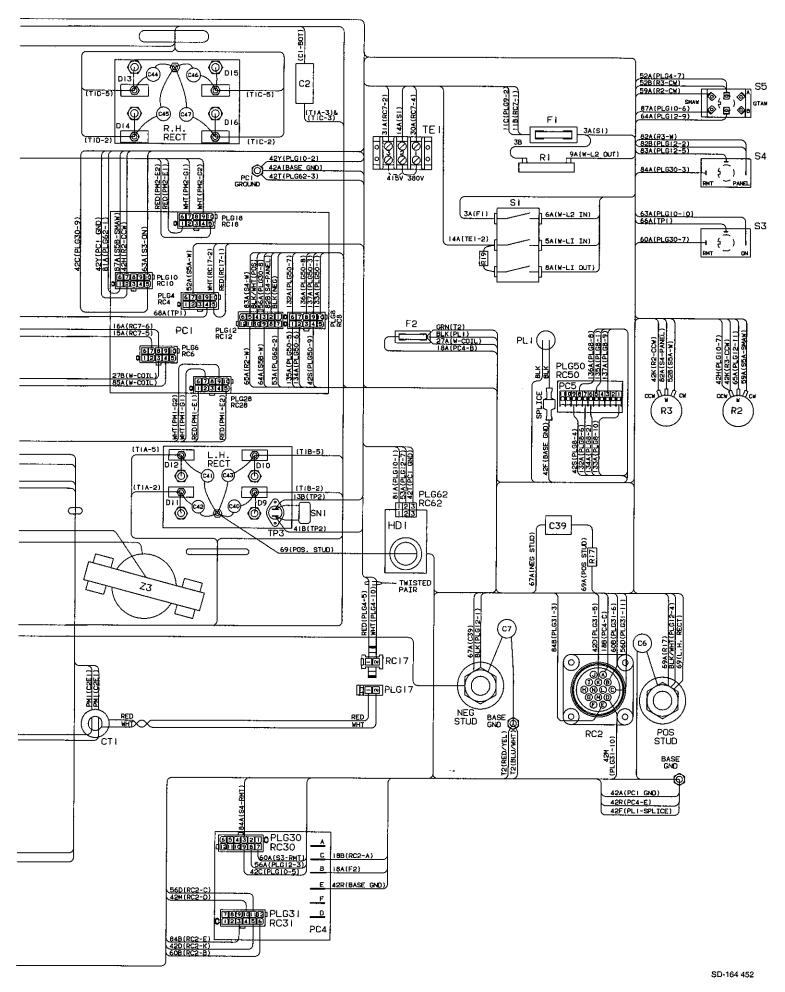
Wiring Diagram For Welding Power Source
